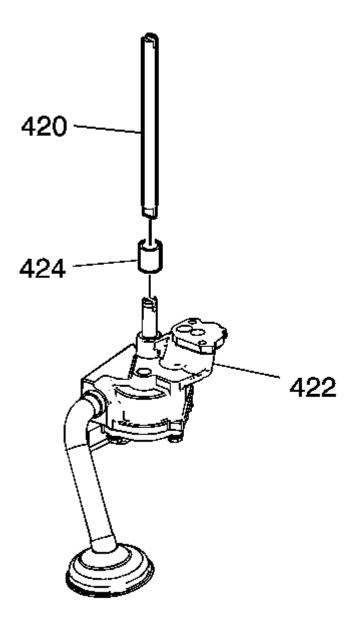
View Of Oil Pump, Driveshaft & Retainer Courtesy of GENERAL MOTORS CORP.
